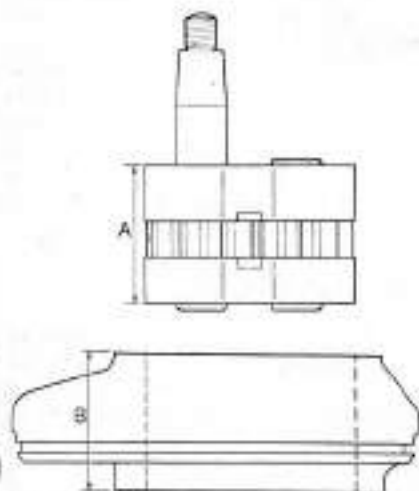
Width (A) of rotors and bearings assembly must be not more than 0.008 narrower than width (B) of pump body.
